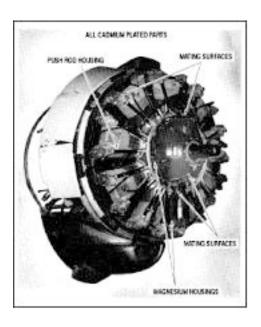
Reciprocating Engine Frontal Area Corrosion Points
